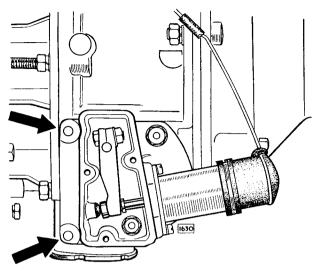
Removing the solenoid bracket—remove the nuts from the studs before unscrewing the two setscrews.
